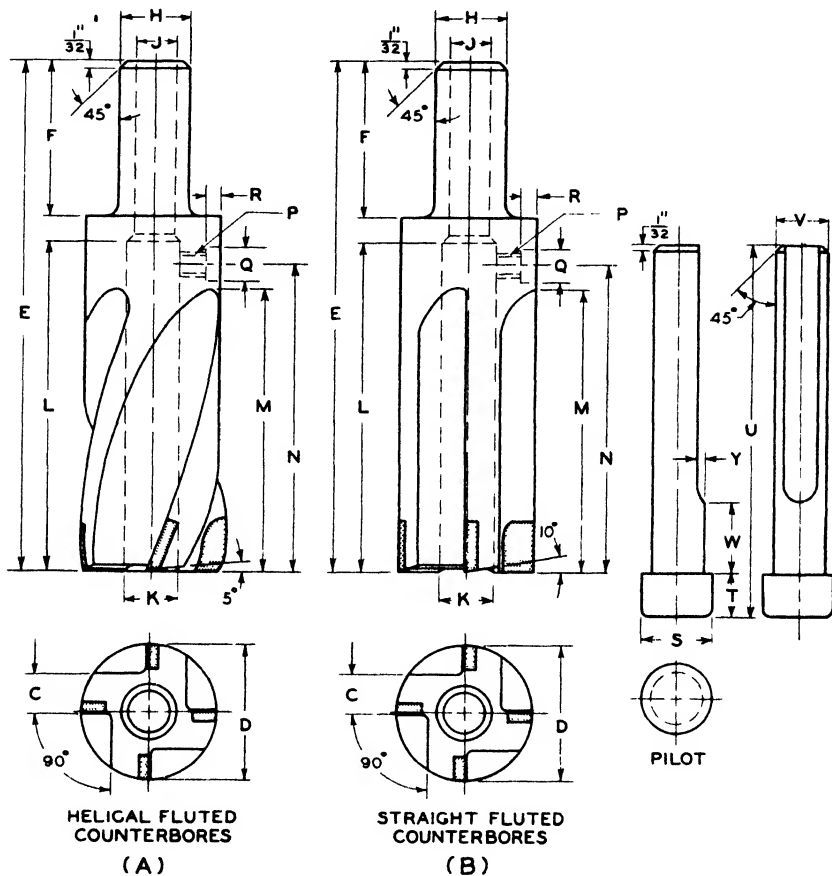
Helical, Fluted Counterbore and Straight, Fluted Counterbore with Details for Dimensions
